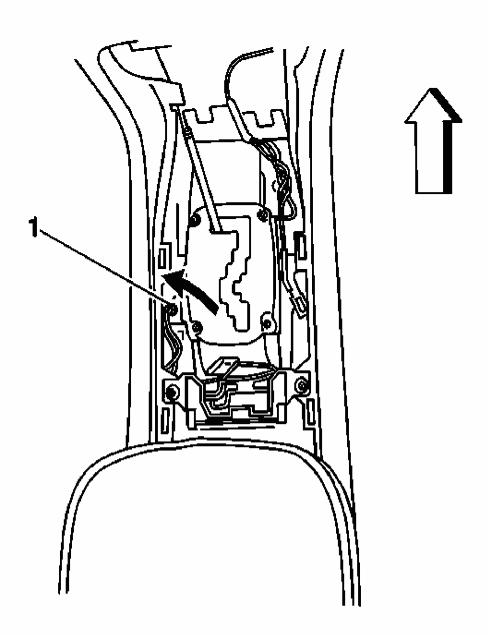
View of Shift Indicator Lamp Socket Courtesy of GENERAL MOTORS CORP.
